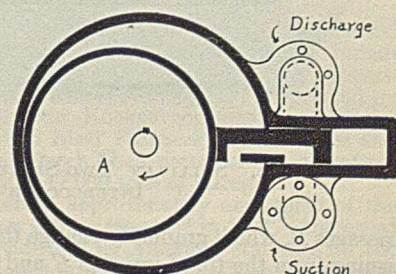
VACUUM PUMP WITH ECCENTRIC ROTOR
